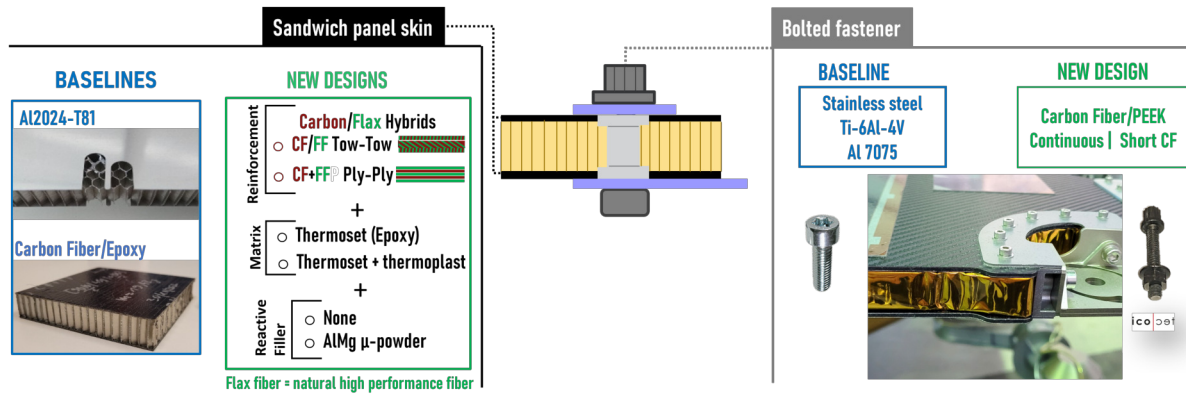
Illustration of our benchmark design composed of a sandwich panel and its through-thickness bolted attachment system.
